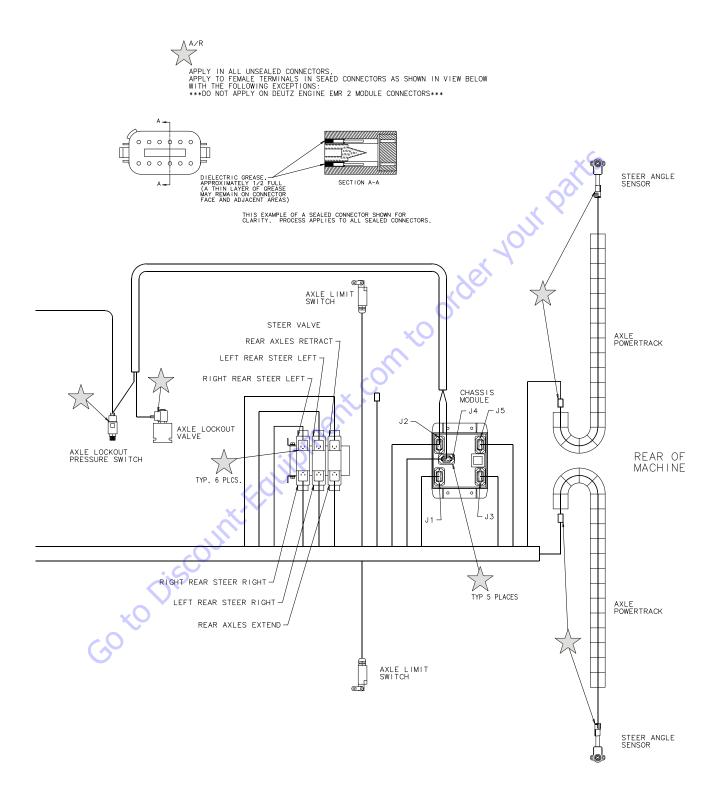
Chassis Electrical Components - Sheet 2 of 2
